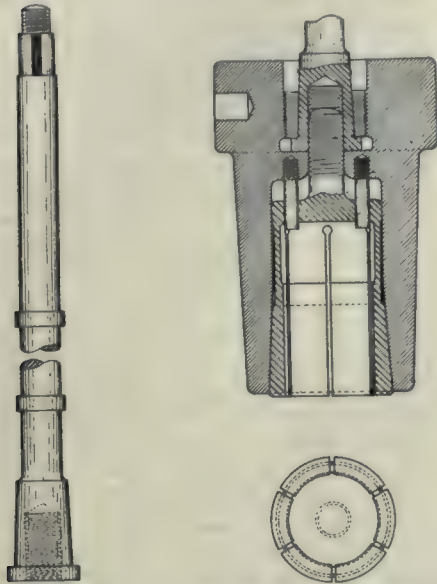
COLLET CHUCK FOR FINISHING INSIDE OF NOSE.
